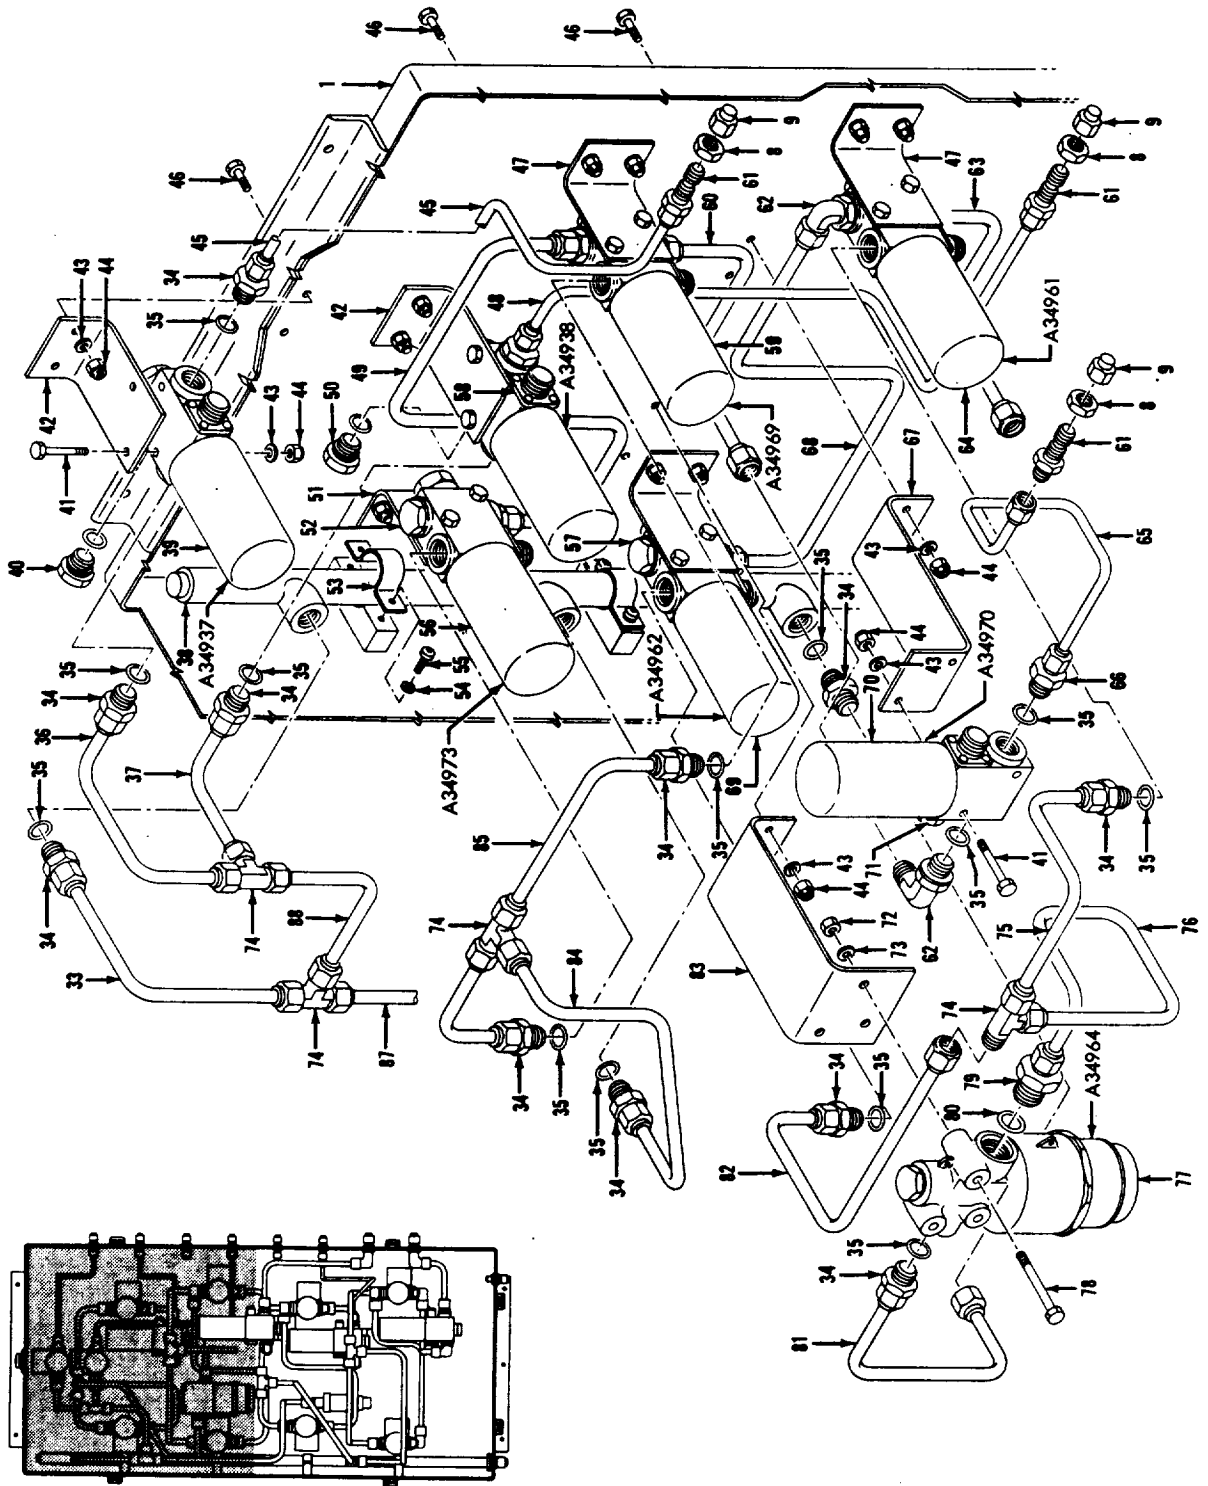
Pneumatic Box Assembly (Sheet 3 of 7)
